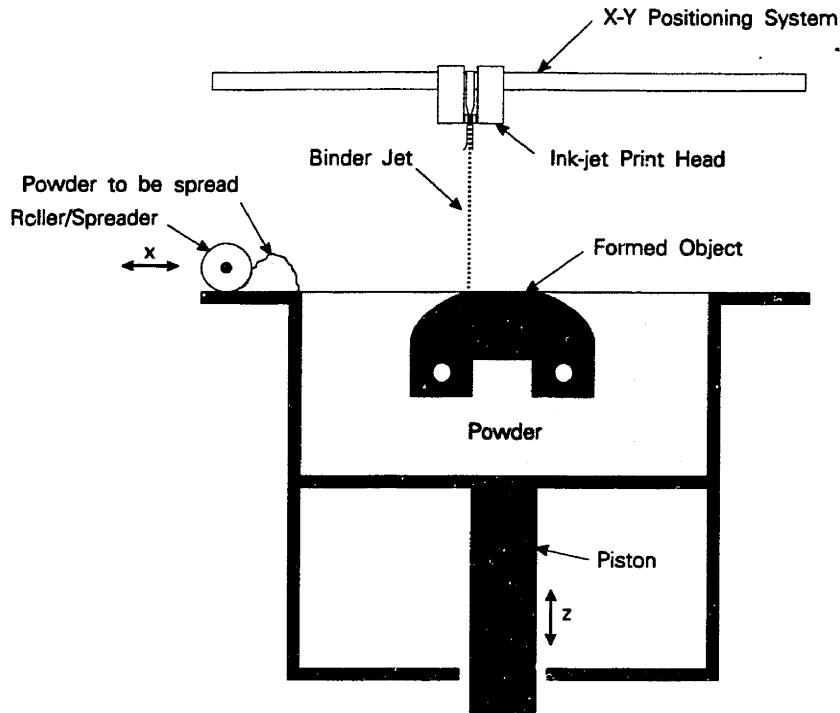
Three dimensional printing (3DP) builds parts by ink-jet printing binder into a powder bed. The resulting green bodies are then processed by conventional powder component manufacturing methods.
